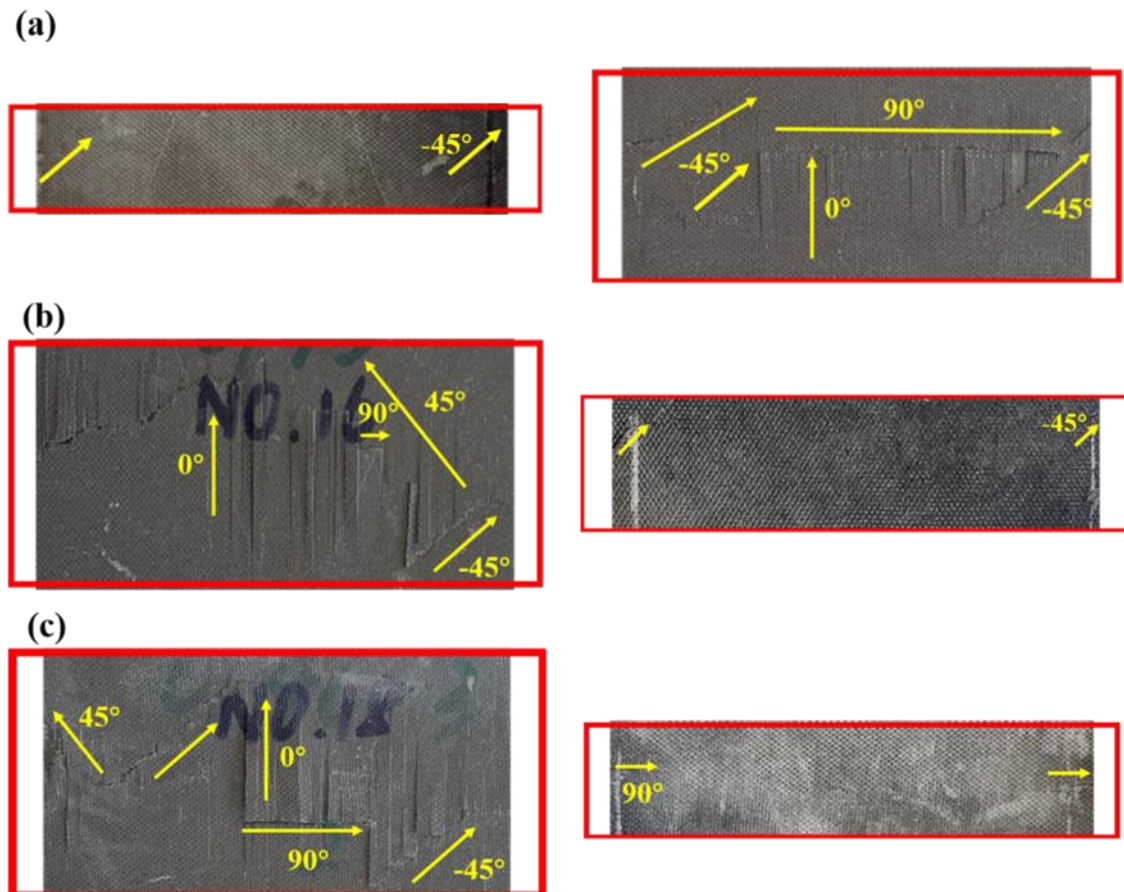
Fracture surfaces of compression fatigue specimens:
